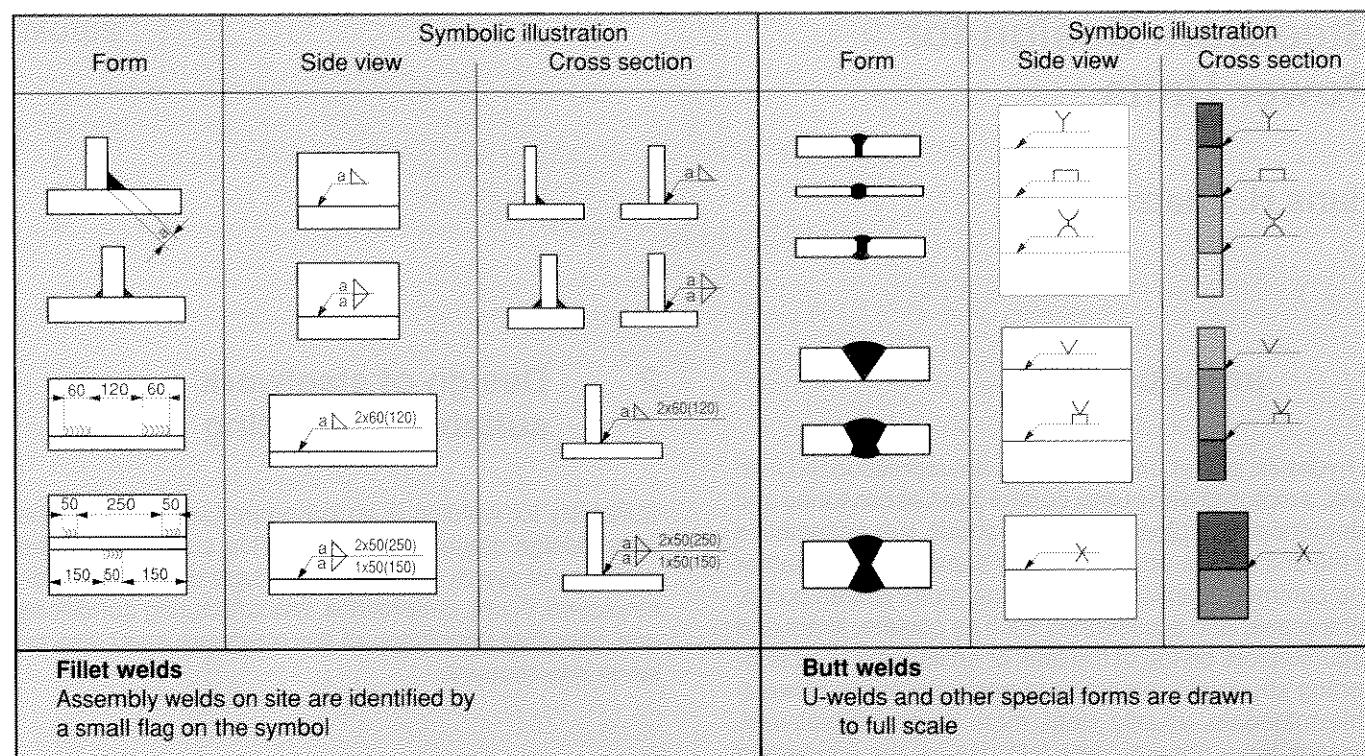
Symbols for workshop drawings for the principal forms of welds (further details will be found in DIN 1912)
